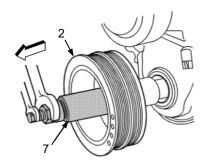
Tighten nut on special tool (7) to seat Harmonic Damper (2) on Crankshaft snout (6)
